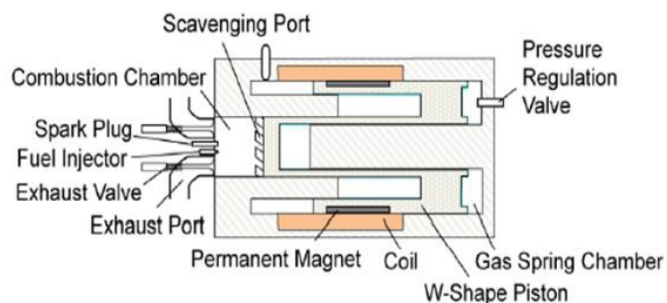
Engine model configuration: single-piston W-shaped SI two-strokes engine [2].
